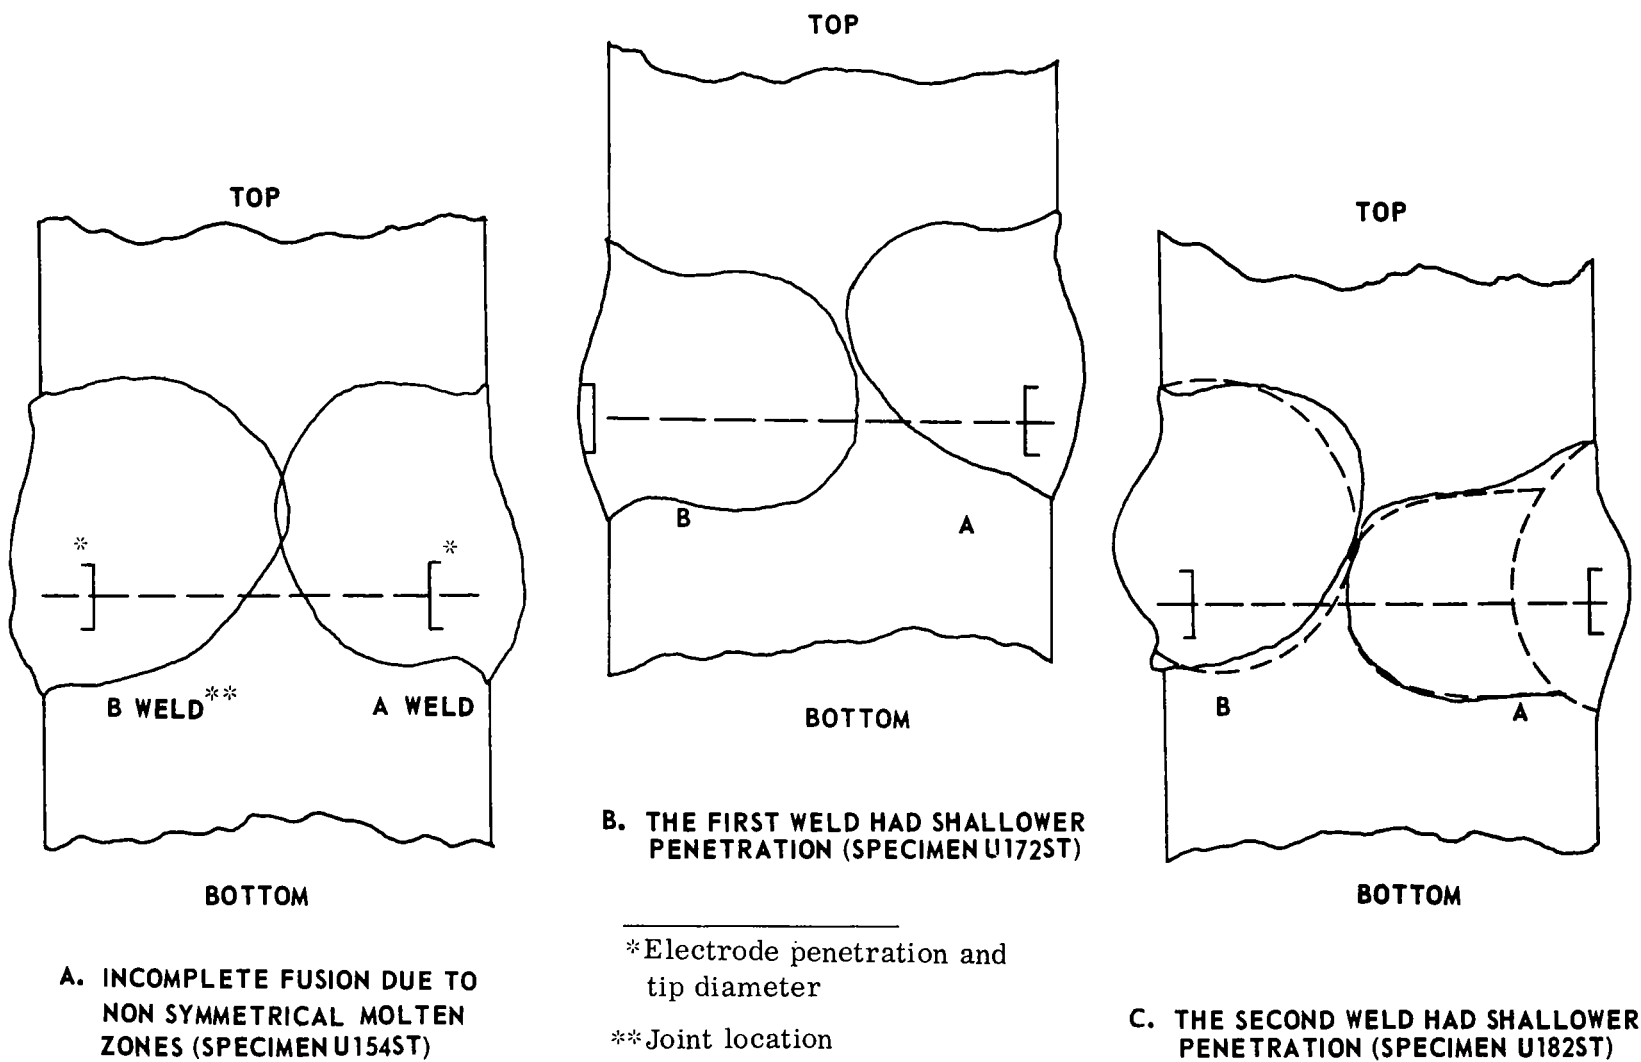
Examples of welds having incomplete fusion and irregular nugget shapes.
